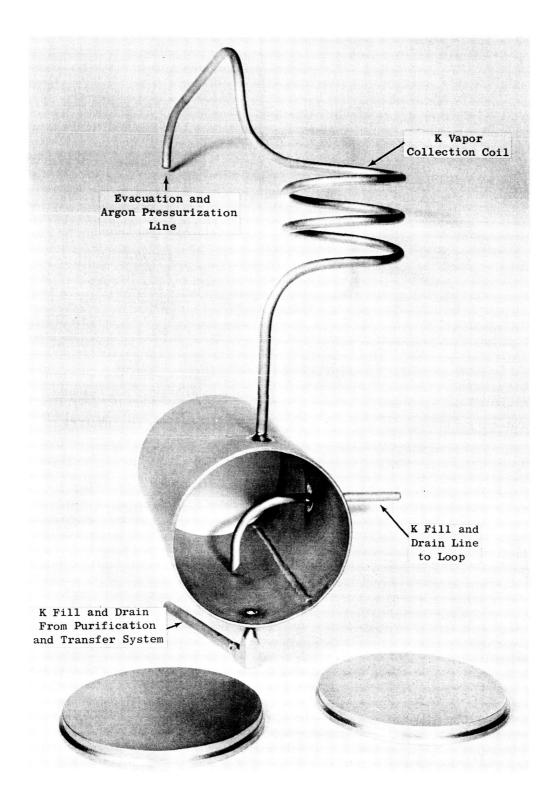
Potassium Surge Tank (6" OD) for the Prototype Corrosion Loop Partially Assembled. (Orig. C65021044)
